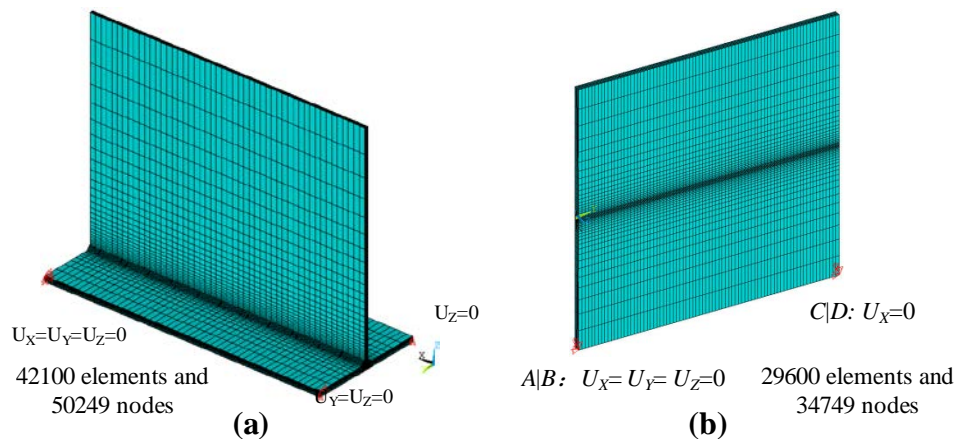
Finite element model of (a)T-Beam (b) butt welding plate
